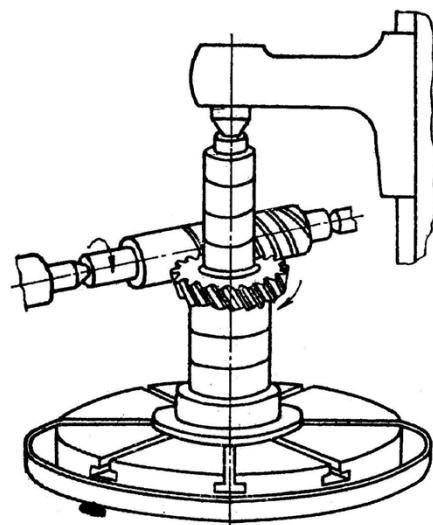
Manufacturing of crossed helical gear on hobbing cutter
